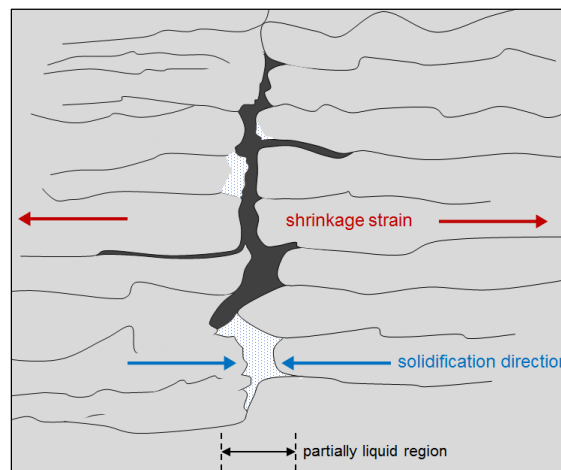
Illustration of Solidification Cracking mechanism in welds. Re-drawn from [32]
